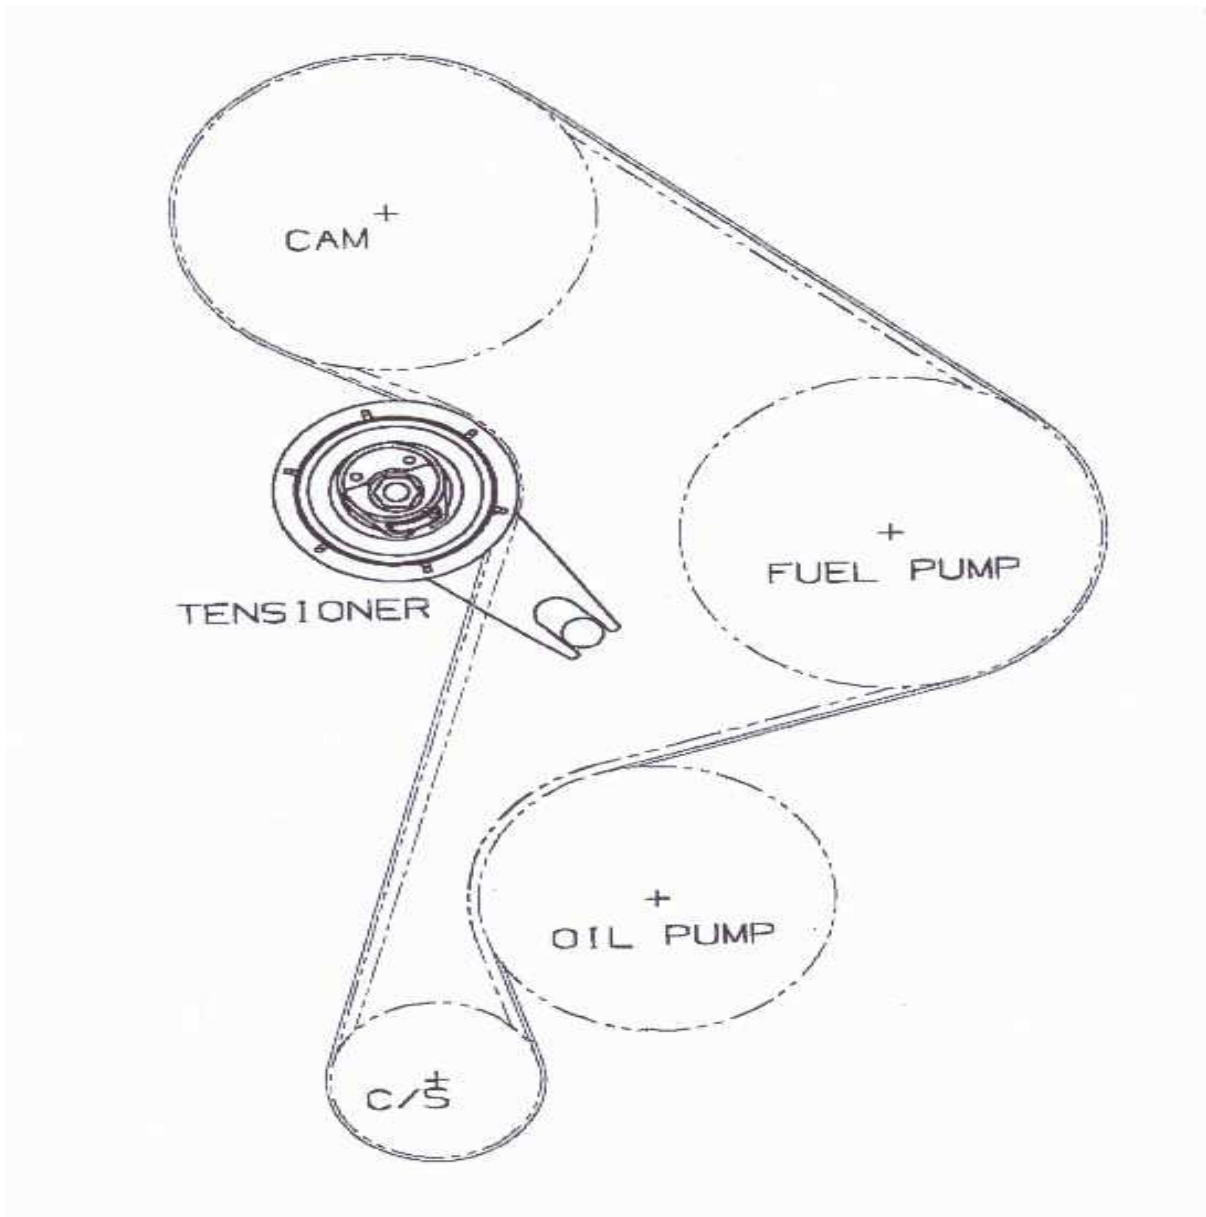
Belt layout for 979229 (VW 1.9L Diesel, I4.)
